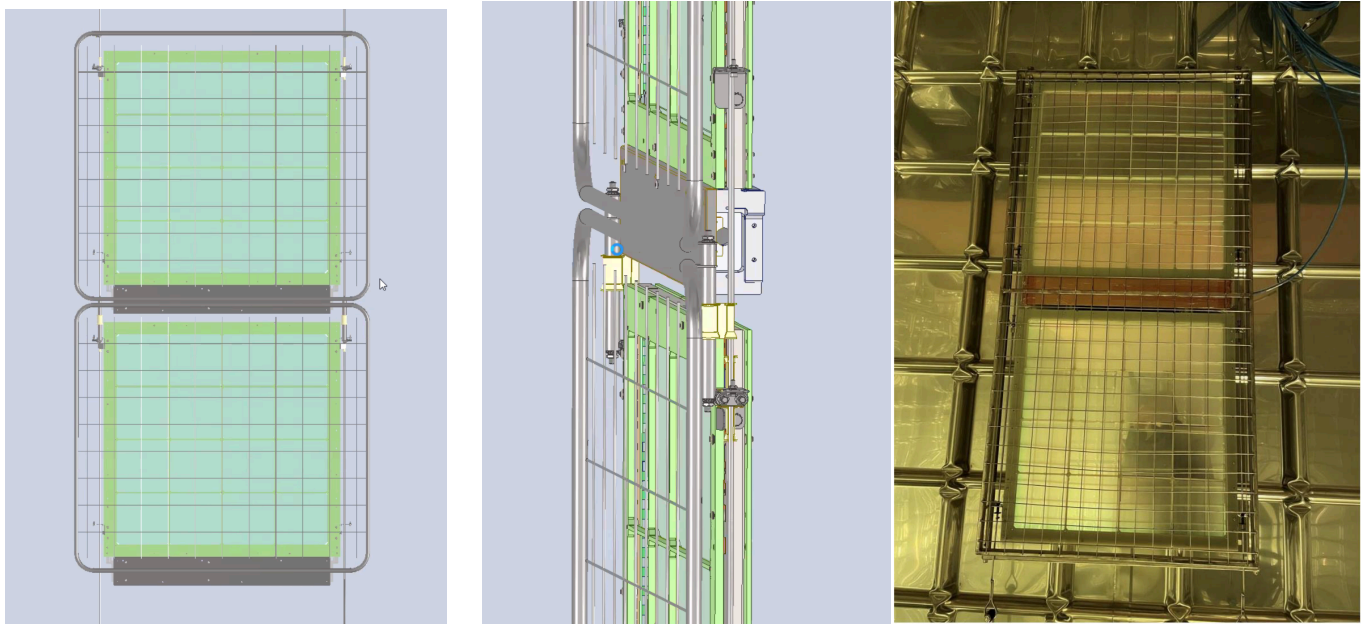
Membrane-mount XA shielding mesh and photo from Module-0 installation
